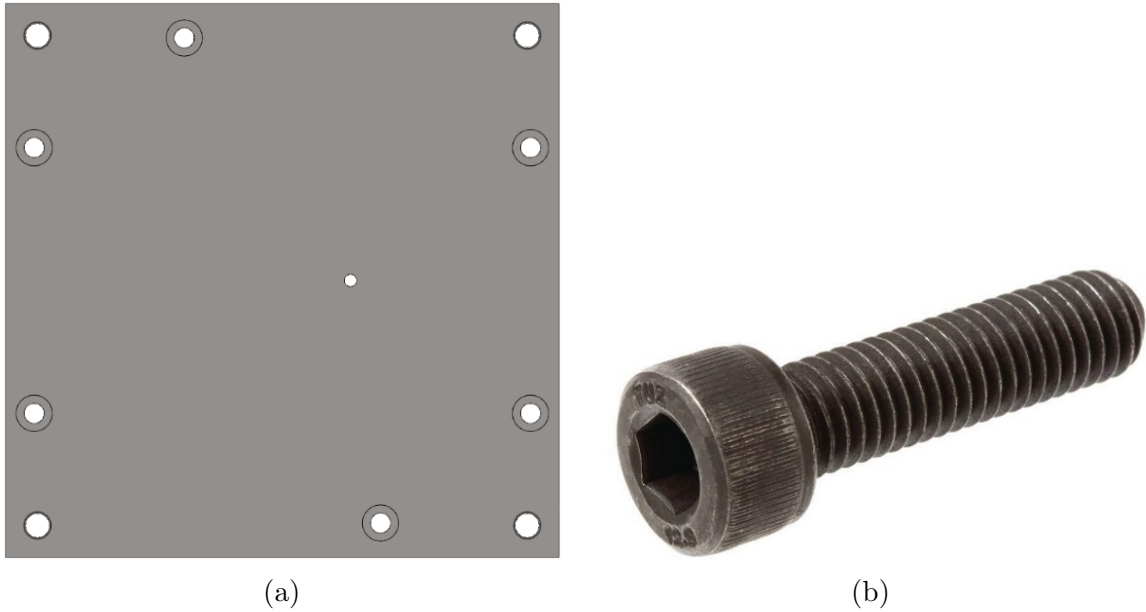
(a) View of upper die from perspective of blank and (b) shoulder screw (McMaster-Carr M10×1.5×90 91290A546) used to secure dies to aluminum cooling plate.
